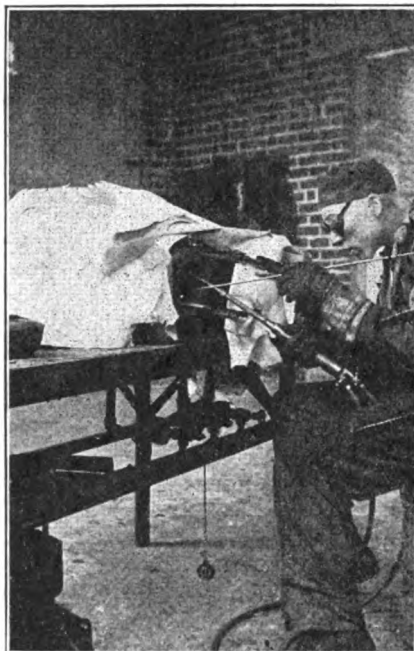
THE CASTING WAS COVERED WITH SHEET ASBESTOS TO CONFINE THE HEAT
